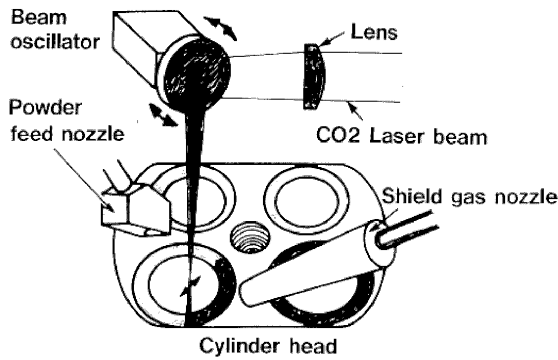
Laser cladding of valve seat for engine (Toyota Motors Co)
